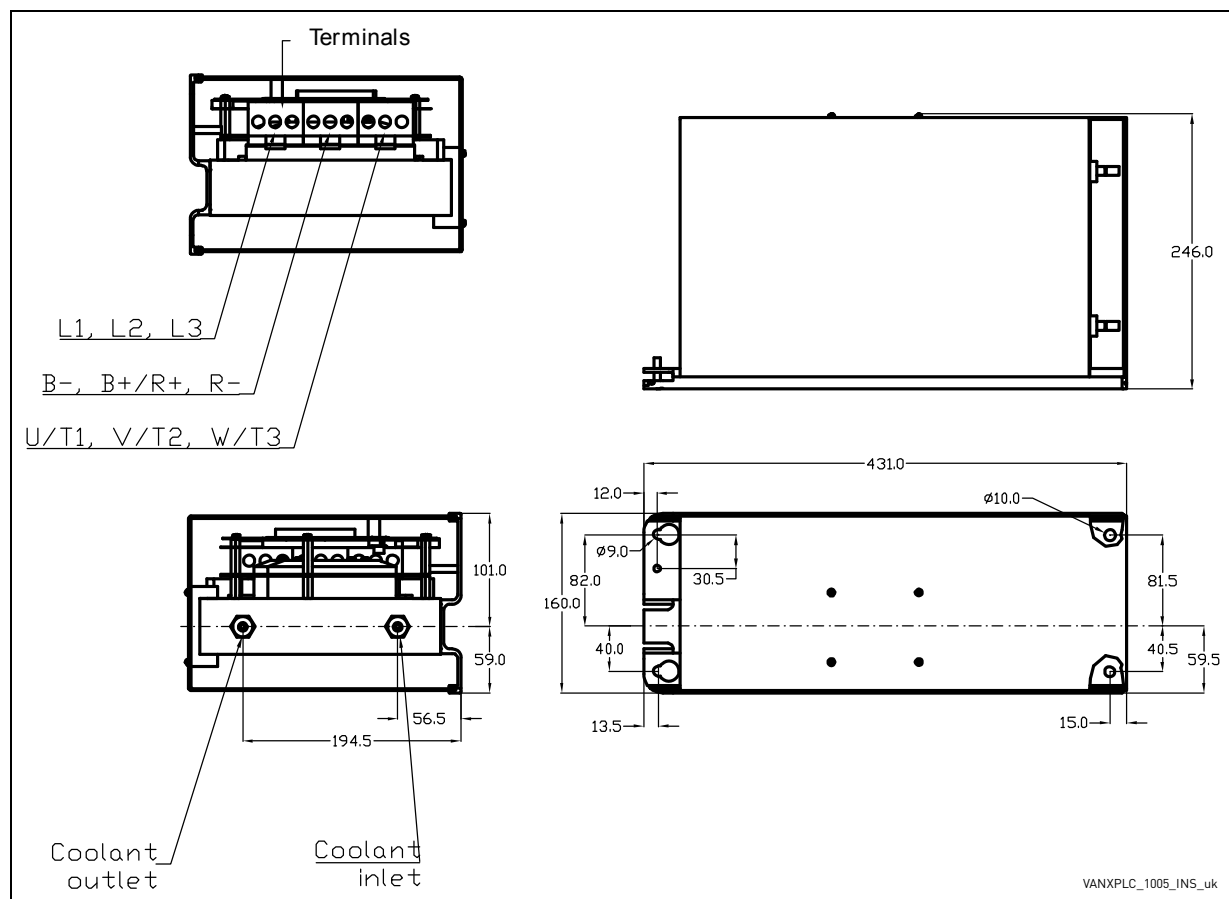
Vacon NX Liquid-Cooled drive dimensions, CH3
